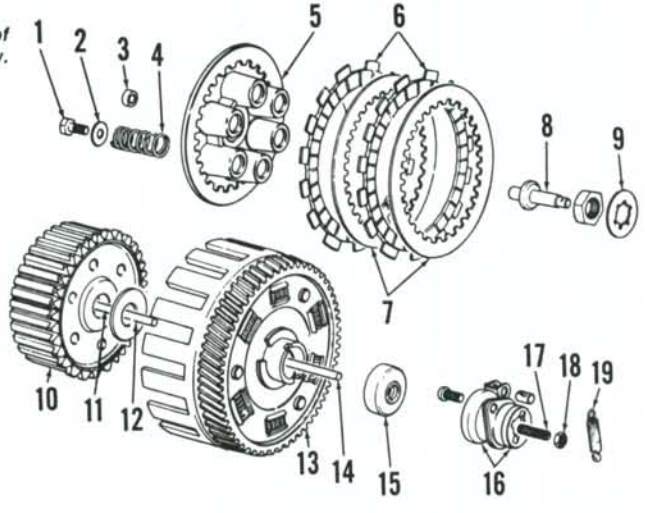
View of clutch and release mechanism used on TM 250 K models. Clutch components are similar to other models.
